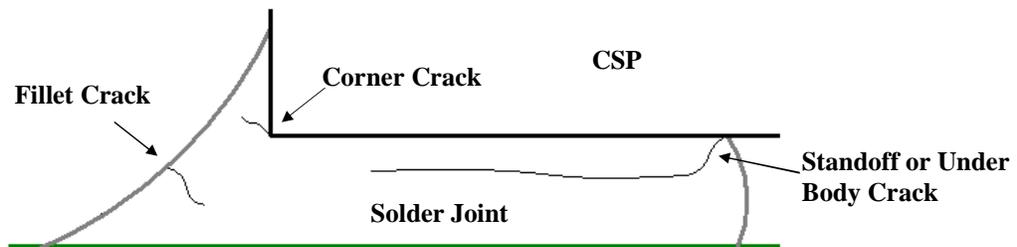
Resistor Solder Joint Crack Locations
